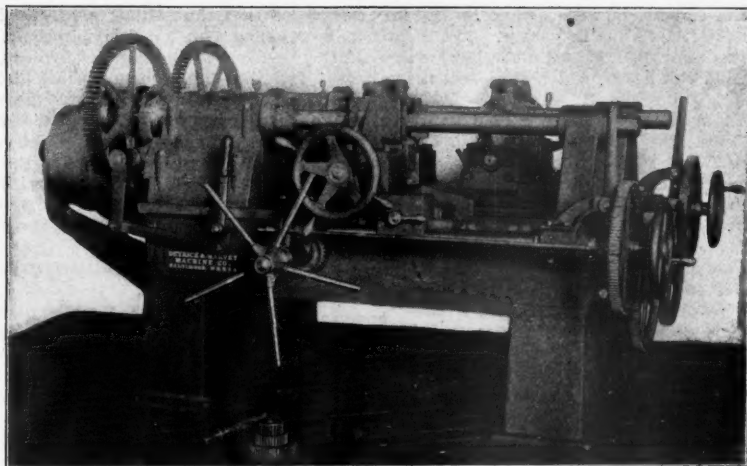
The Detrick &amp; Harvey Double Car Box Boring Machine.
